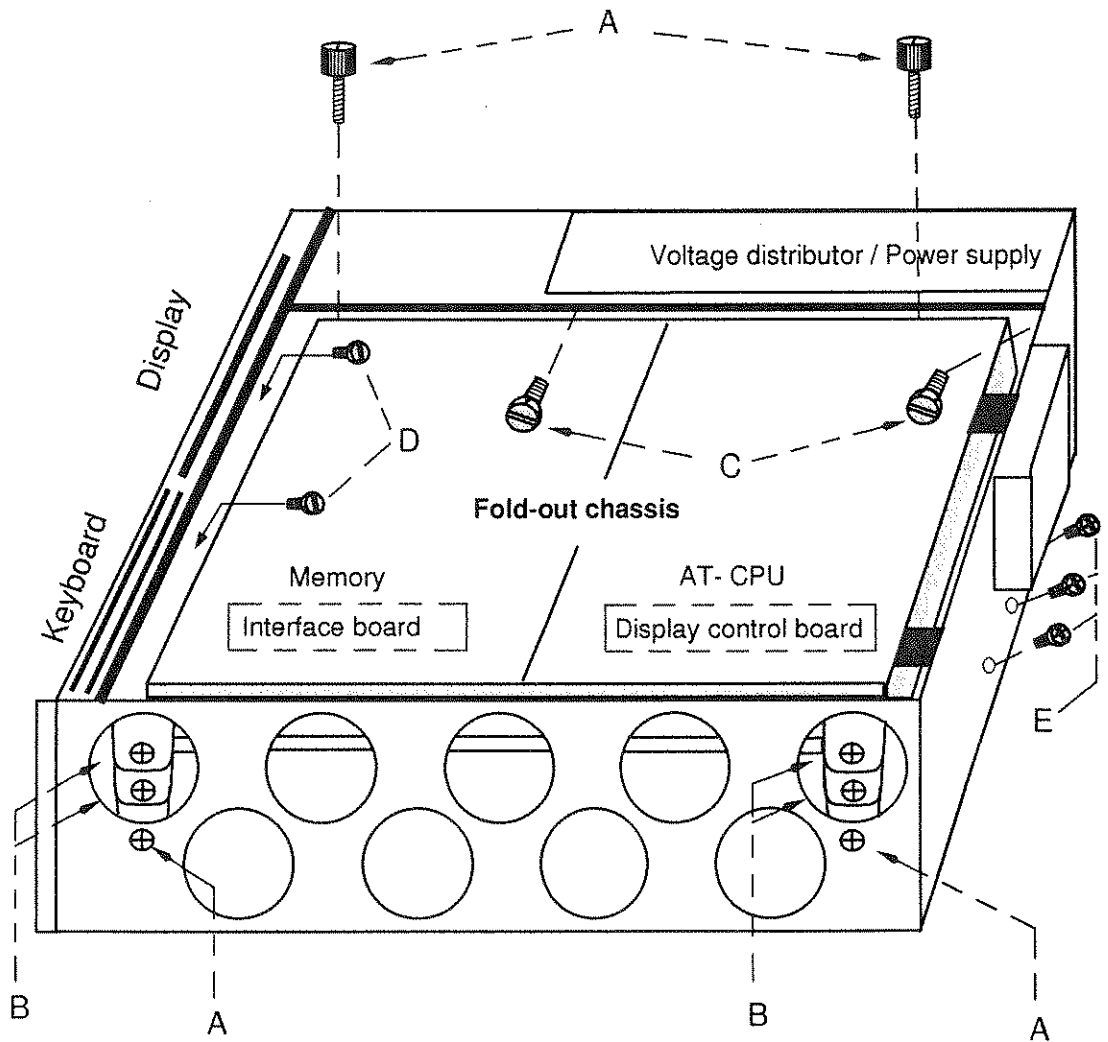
Diagram of instrument showing screws securing the fold-out chassis and the power supply and synthesizer modules (fold-out chassis screening cover removed).
